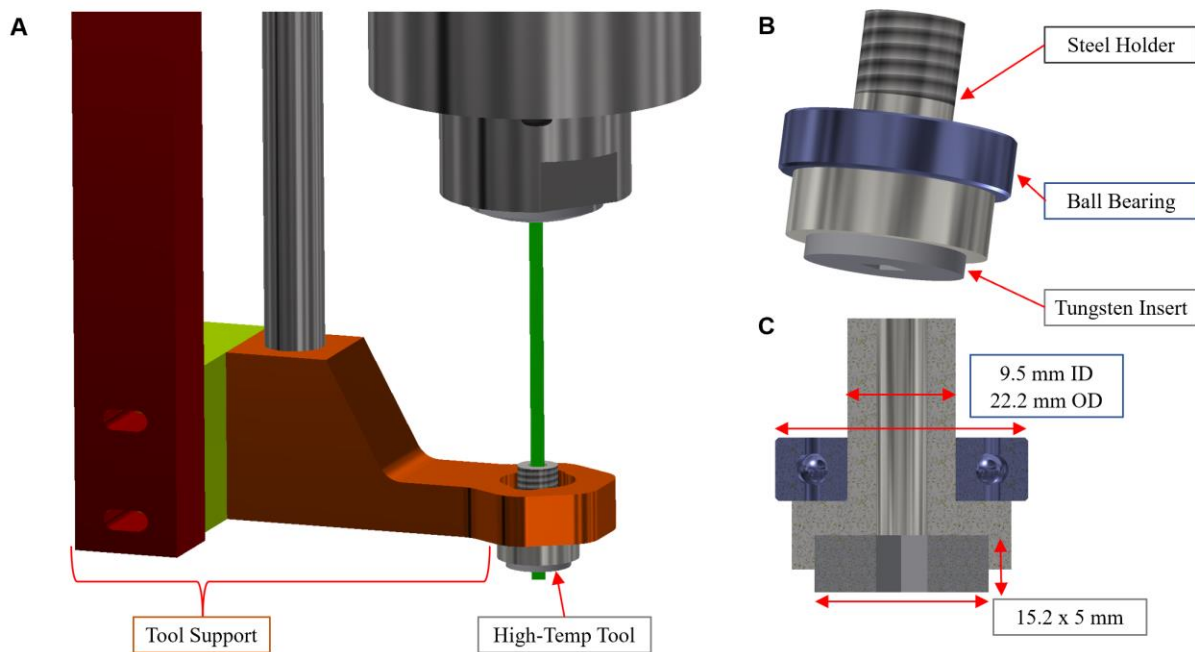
(A) A schematic showing the tool support structure and placement of the designed tool piece. (B) Angle view and (C) cross-section view of the tool pieces, showing geometric details of the steel holder, ball bearing structure, and W alloy insert.
